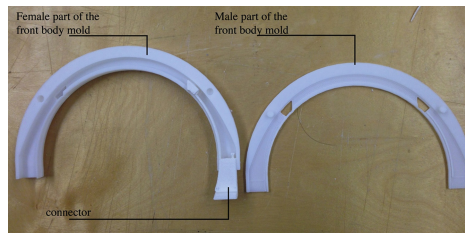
The picture shows the two pieces of the 3D printed mold and one connector
